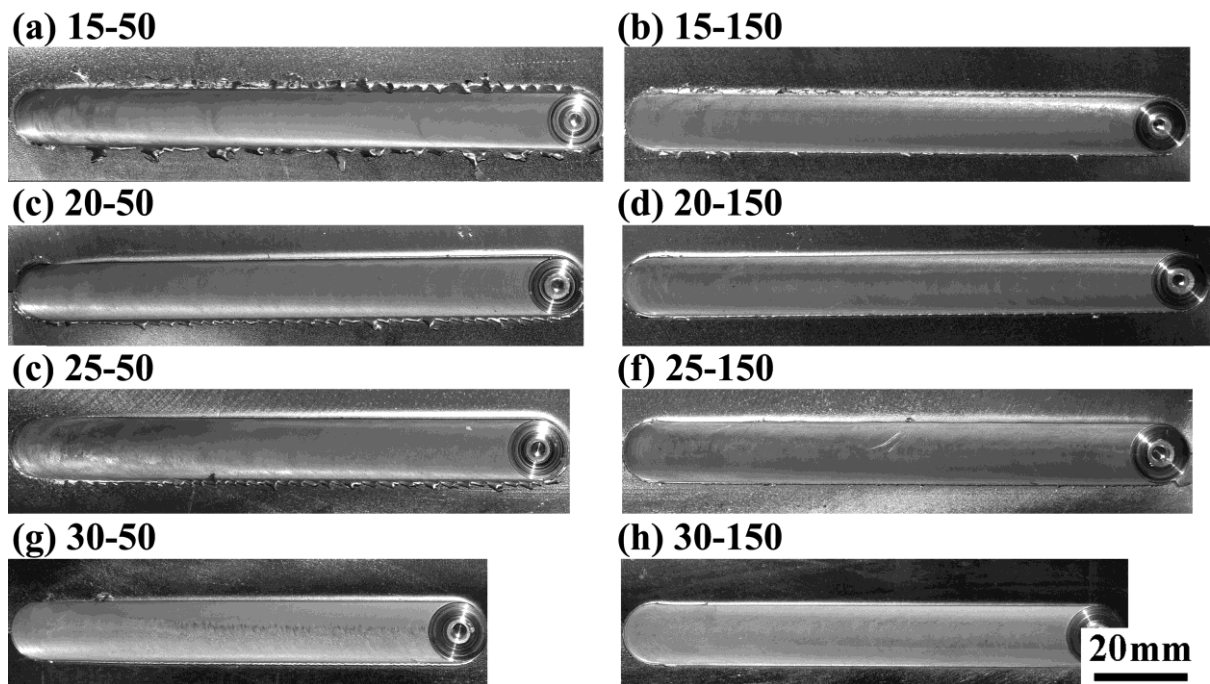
The surface morphologies of FSW $B_4Cp/6061Al$ joints.
